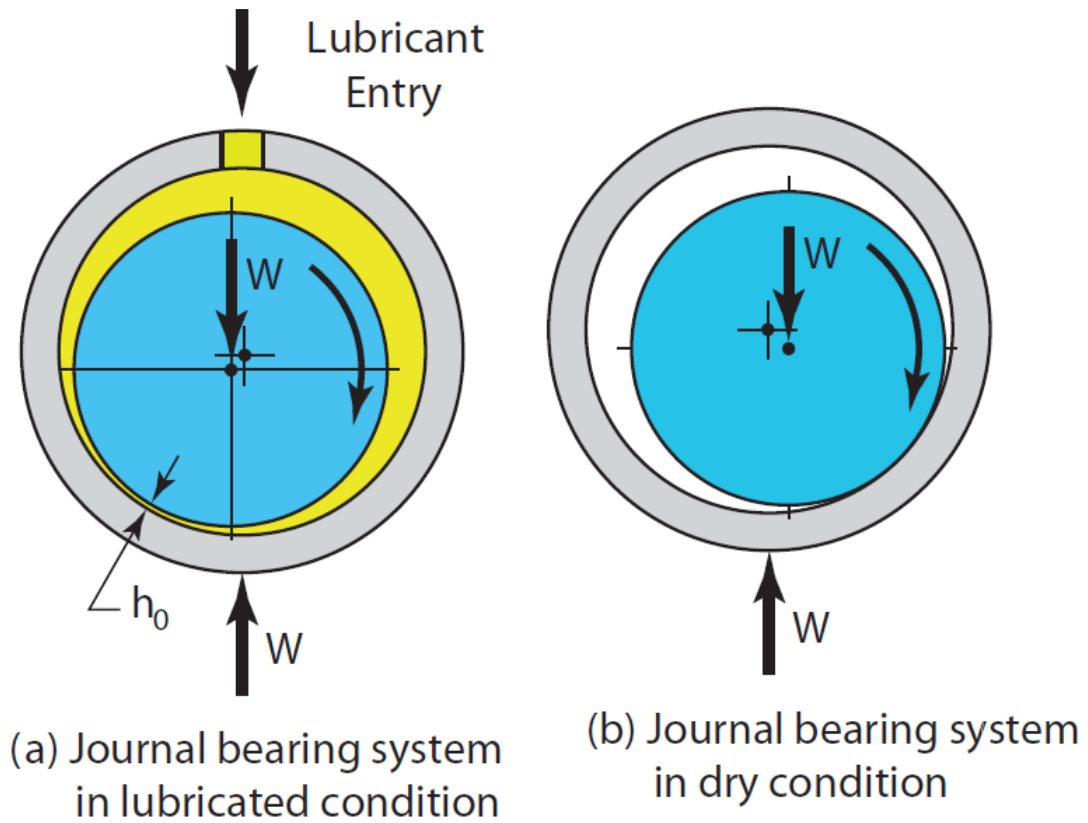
Journal bearing operation in lubricated and unlubricated condition.
